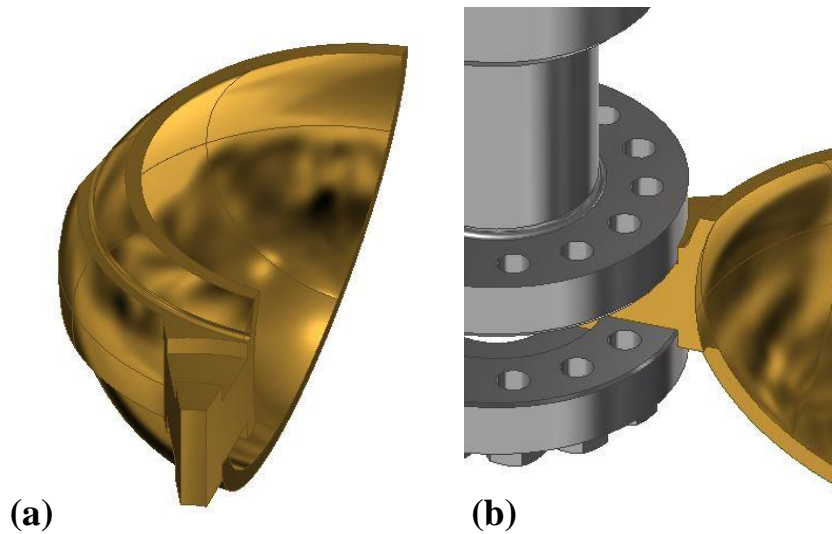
(a) Revised blade design for bolted assembly and (b) interface between bolted blade and hub components.
